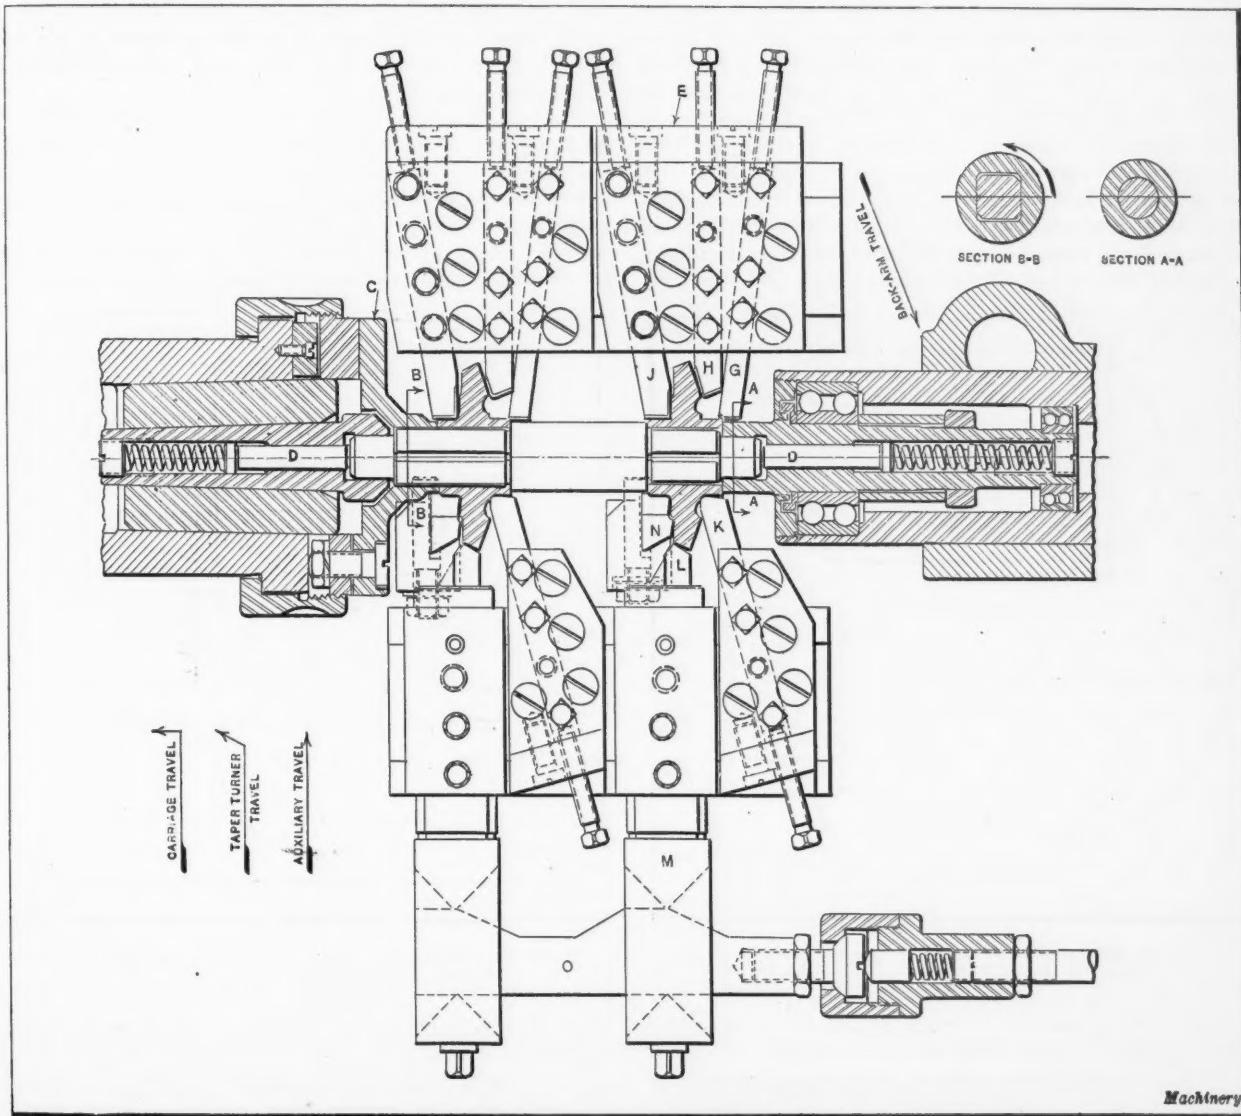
Tooling Equipment used on Fay Automatic Lathes for machining Bevel Gears
